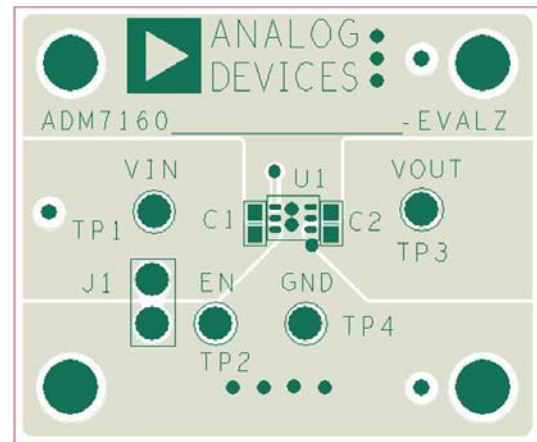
ADM7160CP-EVALZ (6-Lead LFCSP) PCB Layout
